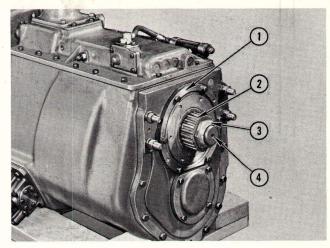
MAINSHAFT BEARING COVER 2. Adaptor 4. Mainshaft 1. Bearing Cover 3. Locknut
